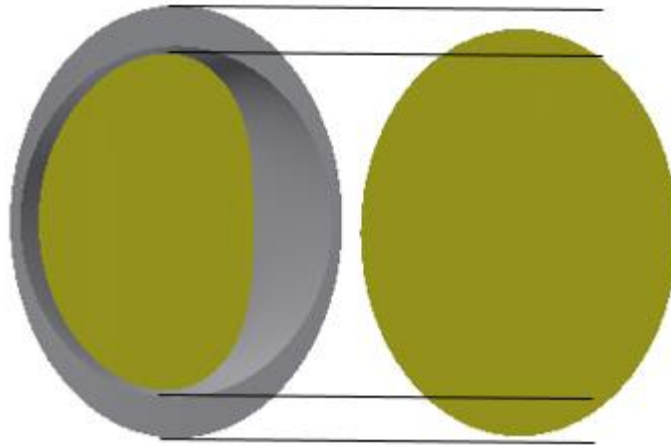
The assembled bottom core and inner core (left,) and the inner core (right) indicating the smaller size to the anterior posterior and lateral dimensions of the bottom core, but greater diameters than the base measurements.
